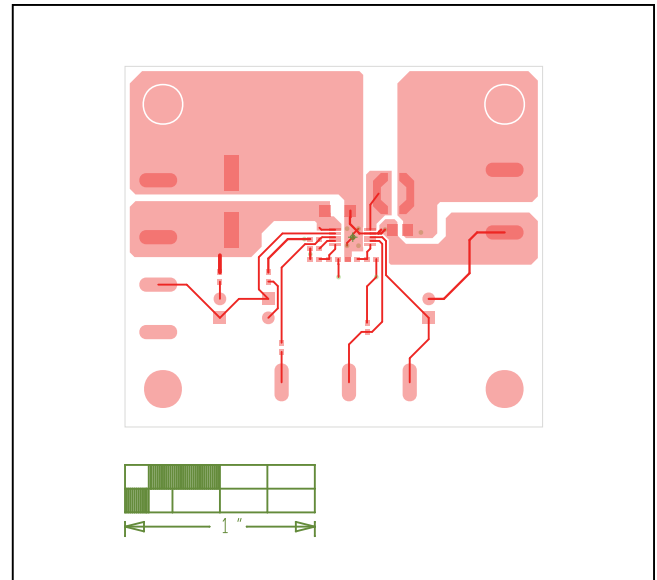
MAX17551 5V EV Kit (μMAX) PCB Layout—Component Side
